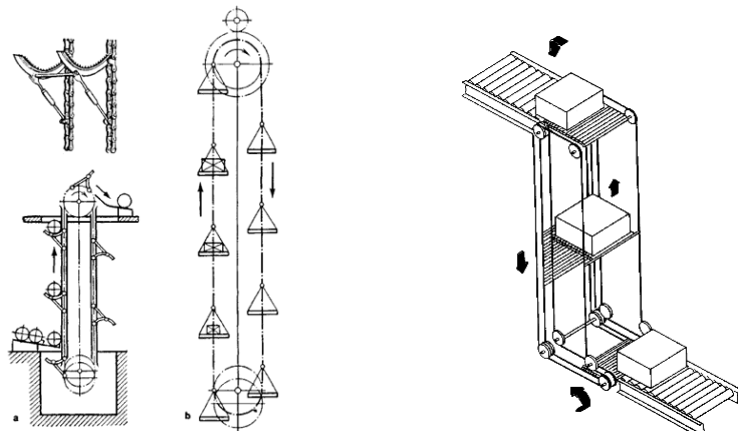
Vertical two-chain elevators for lifting unit loads: (a) tray elevator, (b) cradle-type elevator
